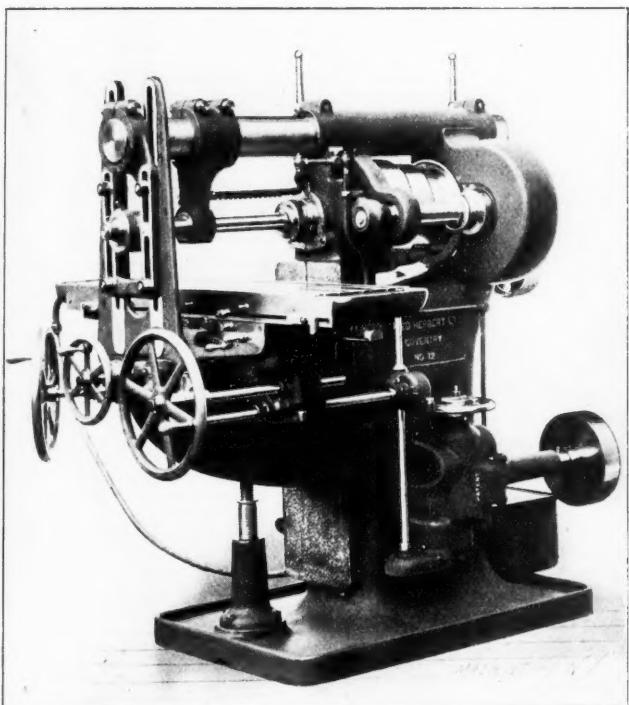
Horizontal Plain Milling Machine, built by Alfred Herbert, Ltd.
